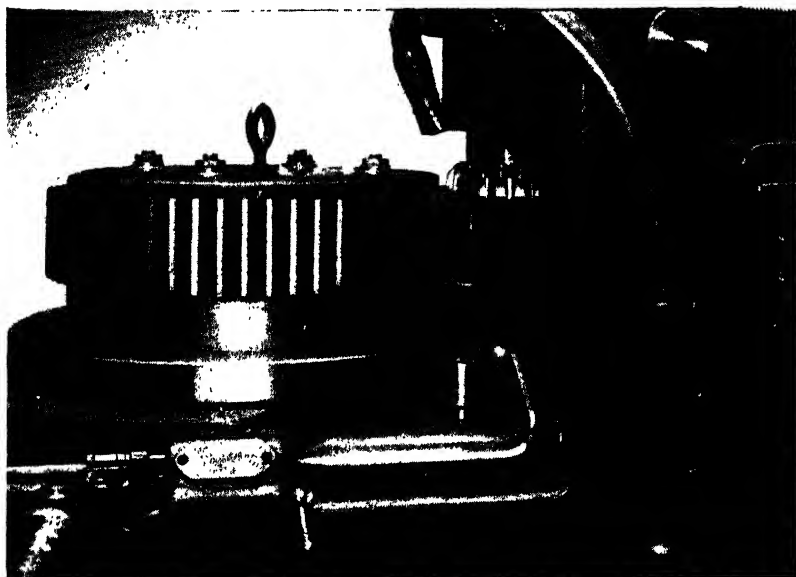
Cutting a Tractor Gear on Gear Shaper
